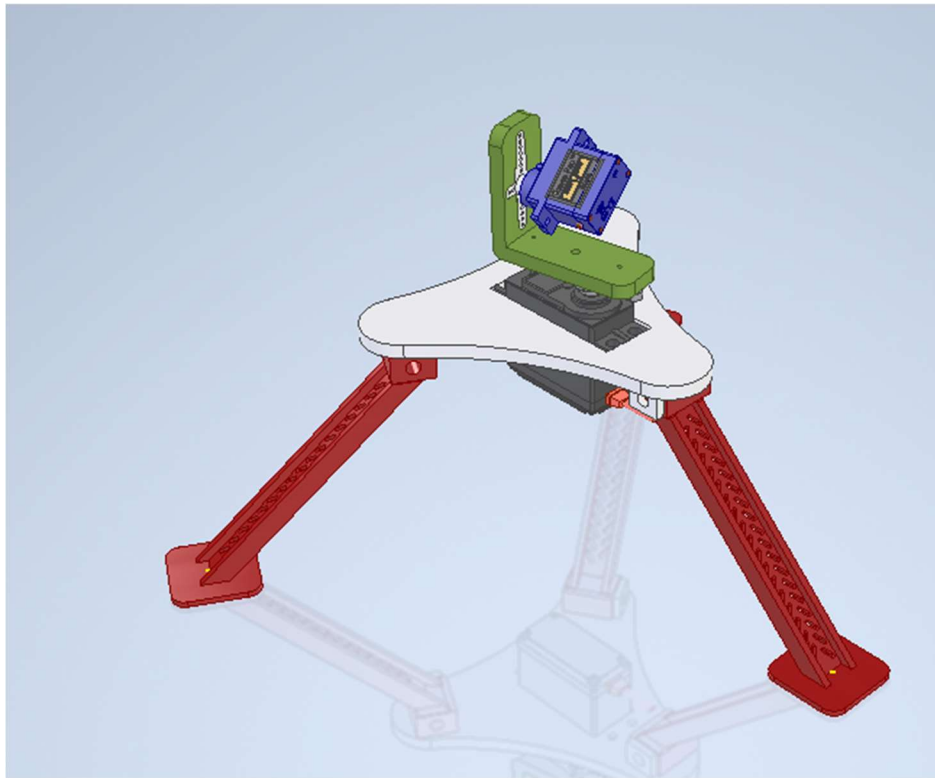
Orthographic view of vertical and horizontal assembly servo mount
